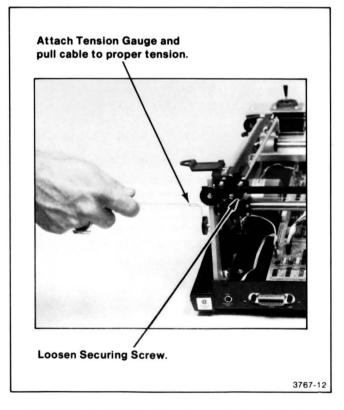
X-Axis Pen Drive Cable Tension Adjustment.
